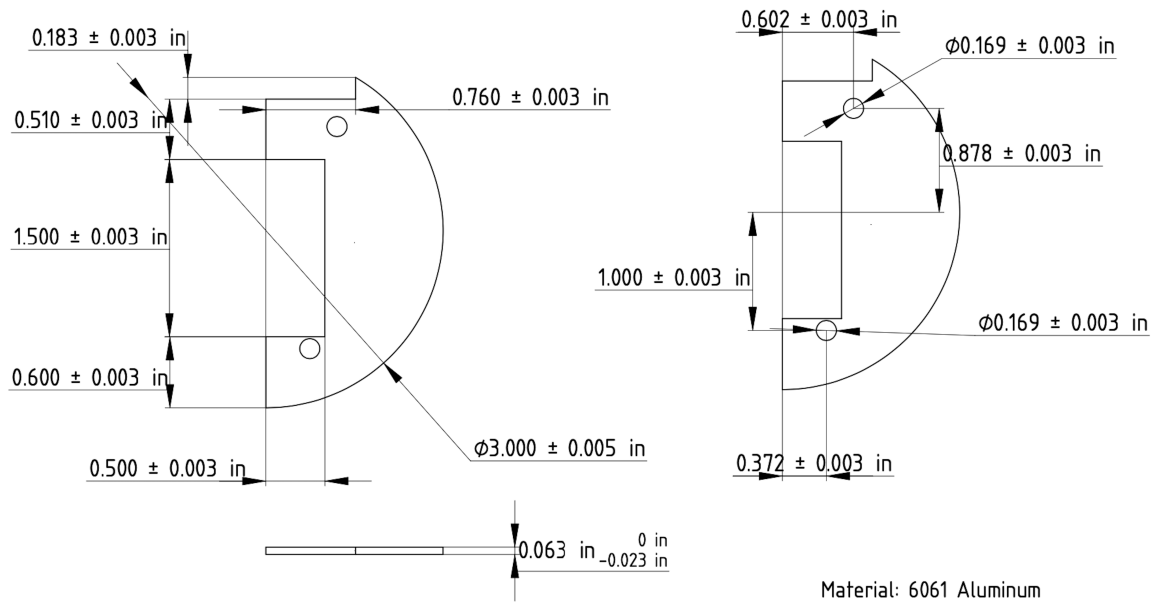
Engineering drawing of right baffle made of 6061 aluminum. Units are in inches.
